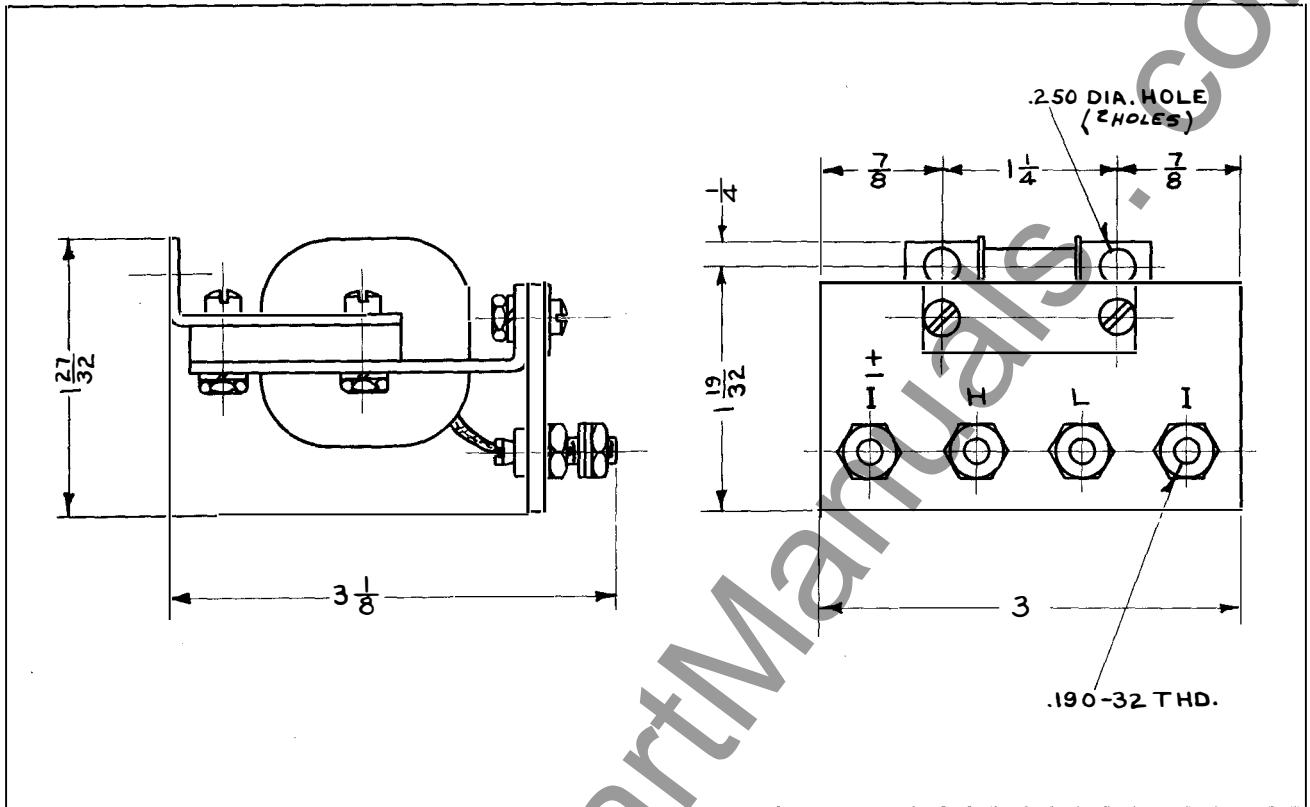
Outline of the Test Milliammeter Auxiliary Transformer. For Reference Only.
